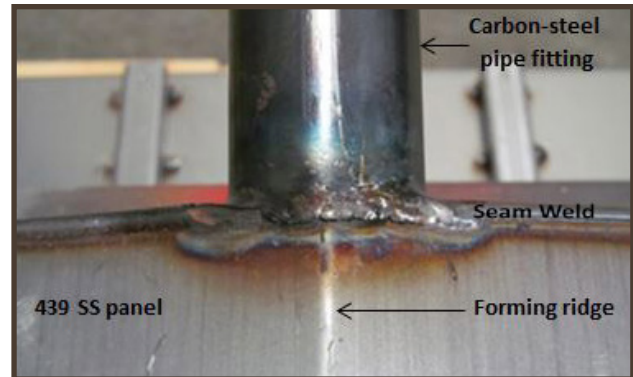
Weld joint between the carbon steel pipe fitting and the SS tank panel.
